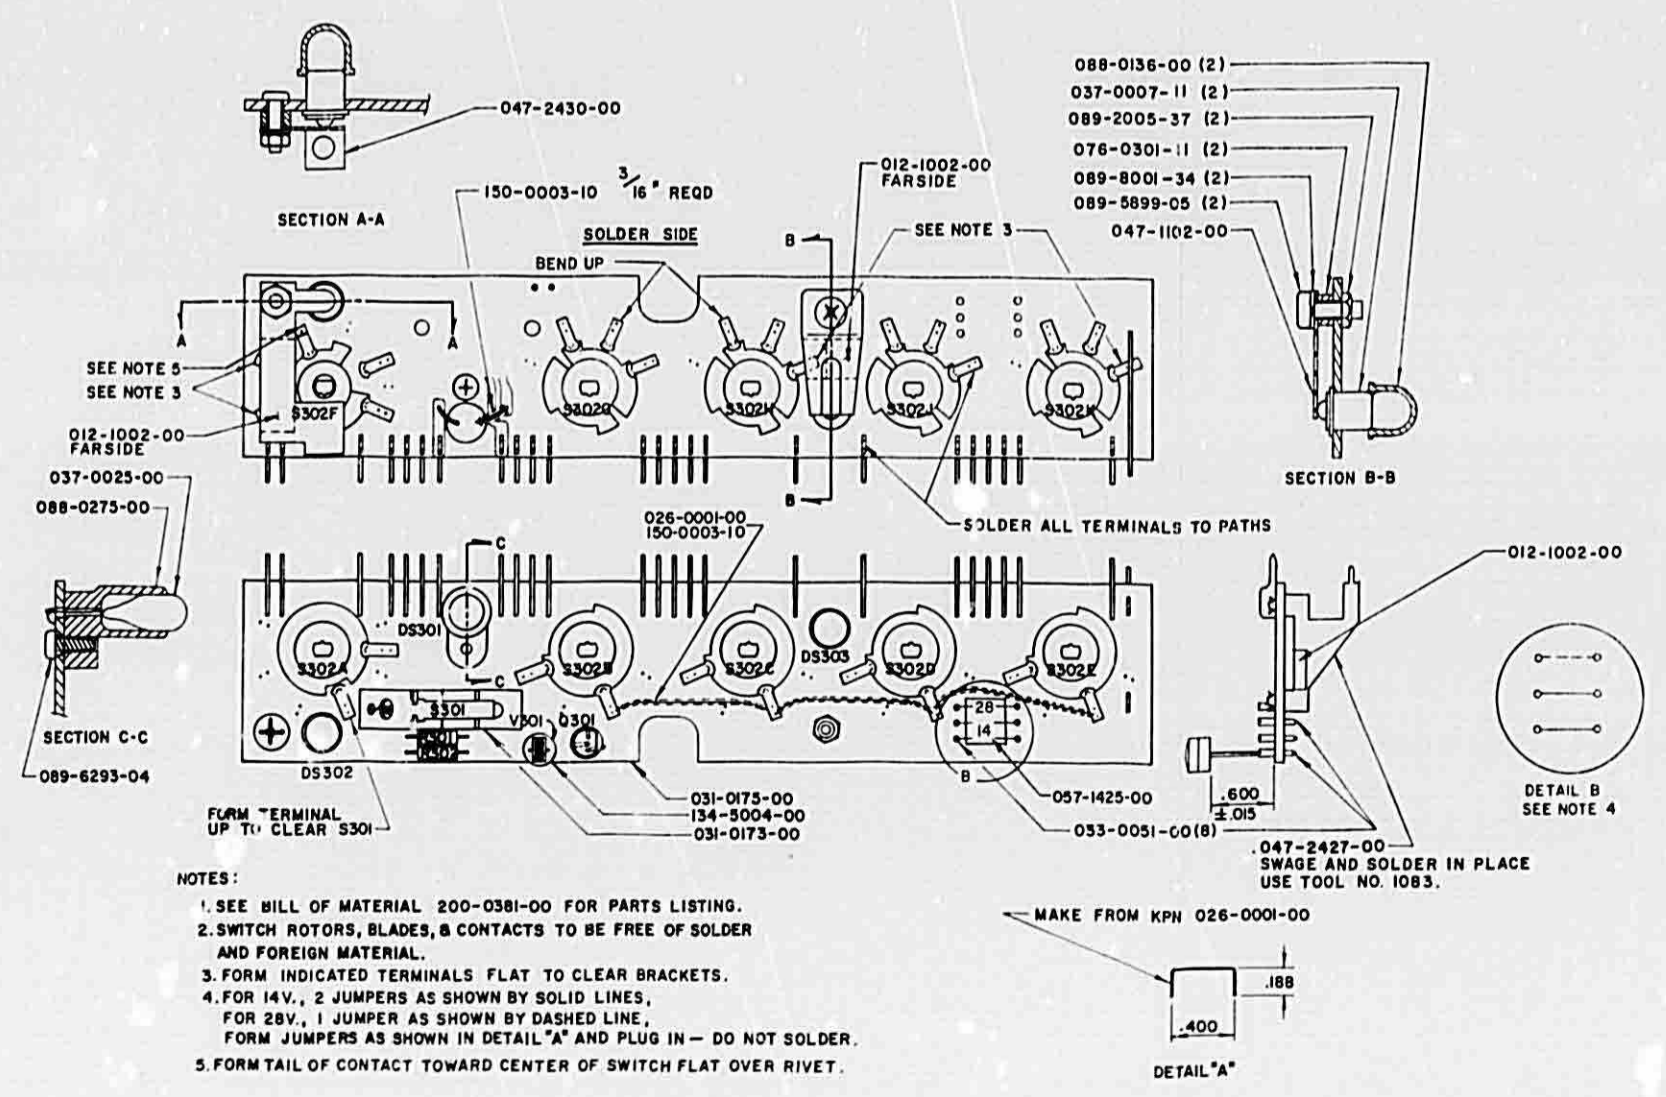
SWITCH BOARD ASSEMBLY
